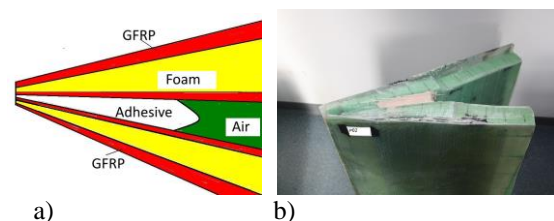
Rear edges of rotor blades of wind power plants consisting of GFRP, adhesive, foam, and air. At the thick end (right side) the distance between the outer surfaces is about 400 mm. a) principle view. b) photo
